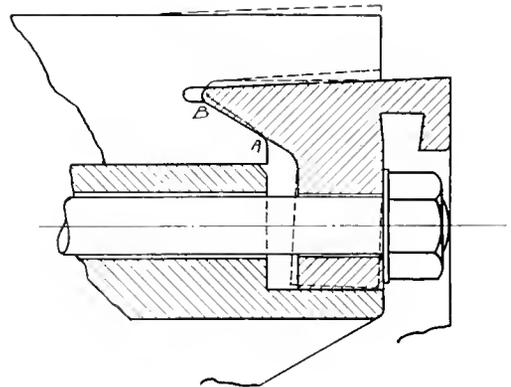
Section of Commutator Showing Distortion Caused by Excessive Tightening of Clamping Bolts
